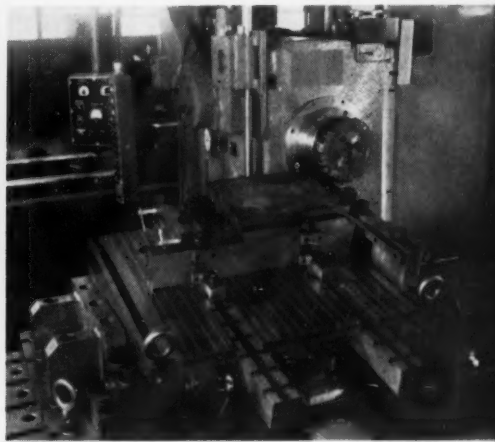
Milling die blocks on a magnetic fixture with a 50-horsepower Triplex Rigidmil.
